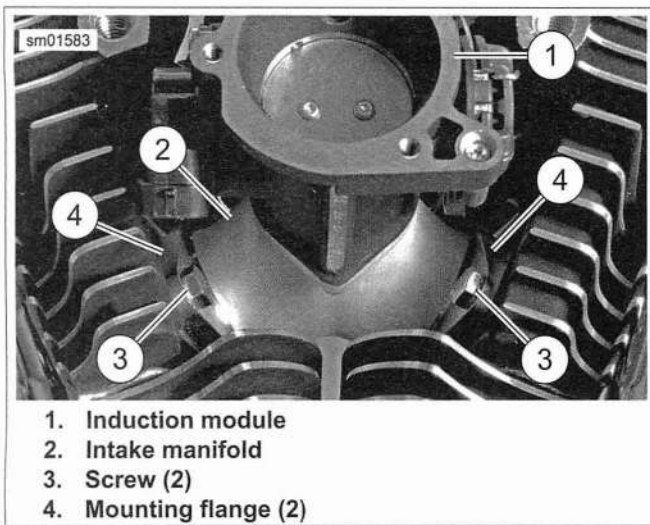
Intake Manifold Mounting Screws: Right Side
